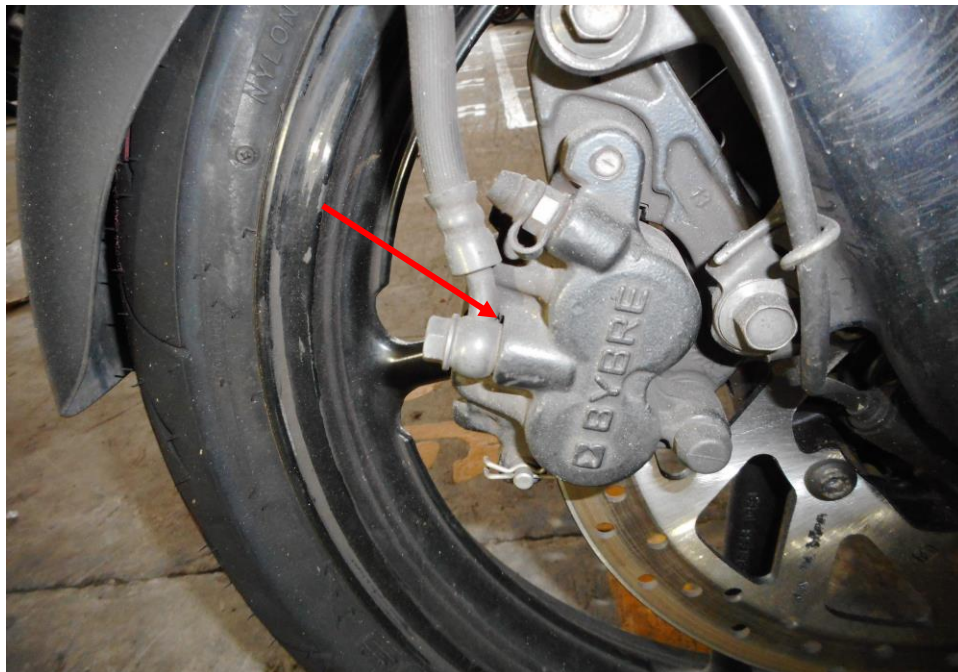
shows our checks on the brake callipers housing (front). There was also no sign(s) or indication(s) of fluid leak observed around the brake calliper housing.
